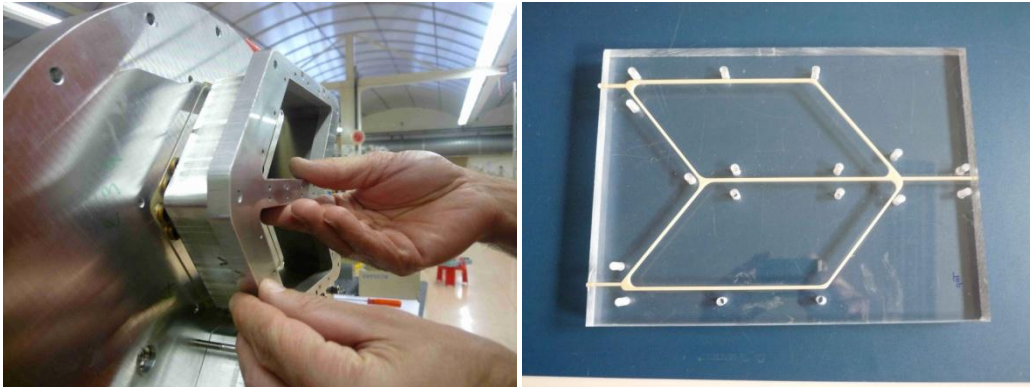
View of the cells partition during assembly (left) and polyurethane joint in the mould (right).
